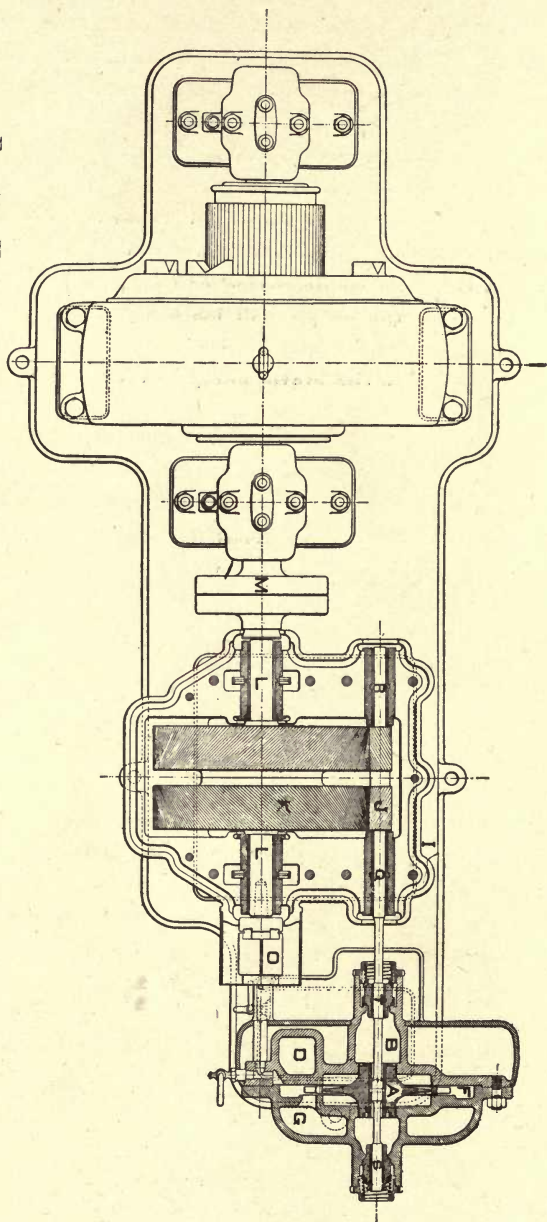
Horizontal Section of De Laval Steam turbine, with Direct-connected Dynamo.
